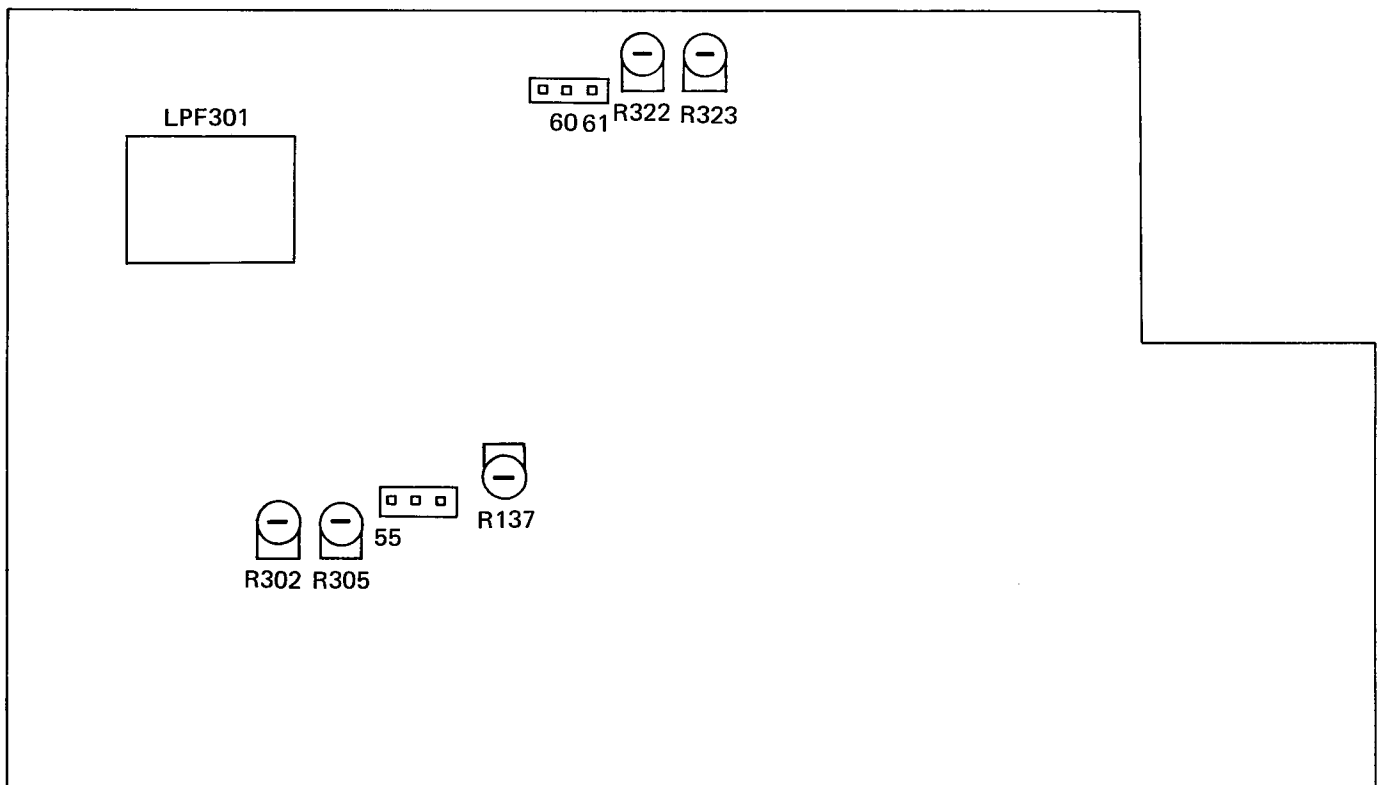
MPX/REGULATOR CIRCUIT BOARD (TOP VIEW)
